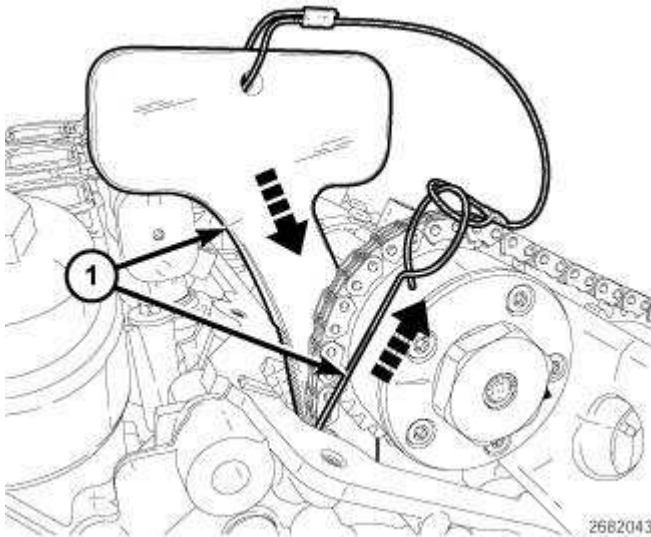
Positioning Timing Chain Holder To Force Rack & Piston Back Into Tensioner Body
